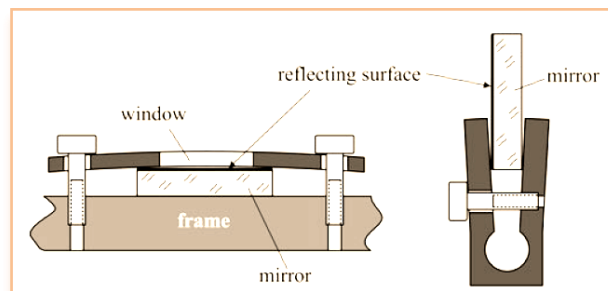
Wrong mounting. Edges will be cleaved and reflecting surface damaged.
